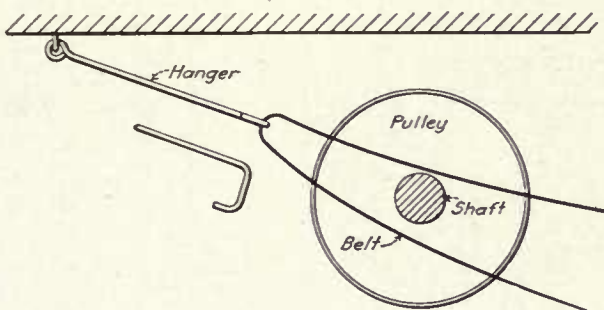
Arrangement for Hanging Idle Belt to Clear Pulley and Line Shaft.
